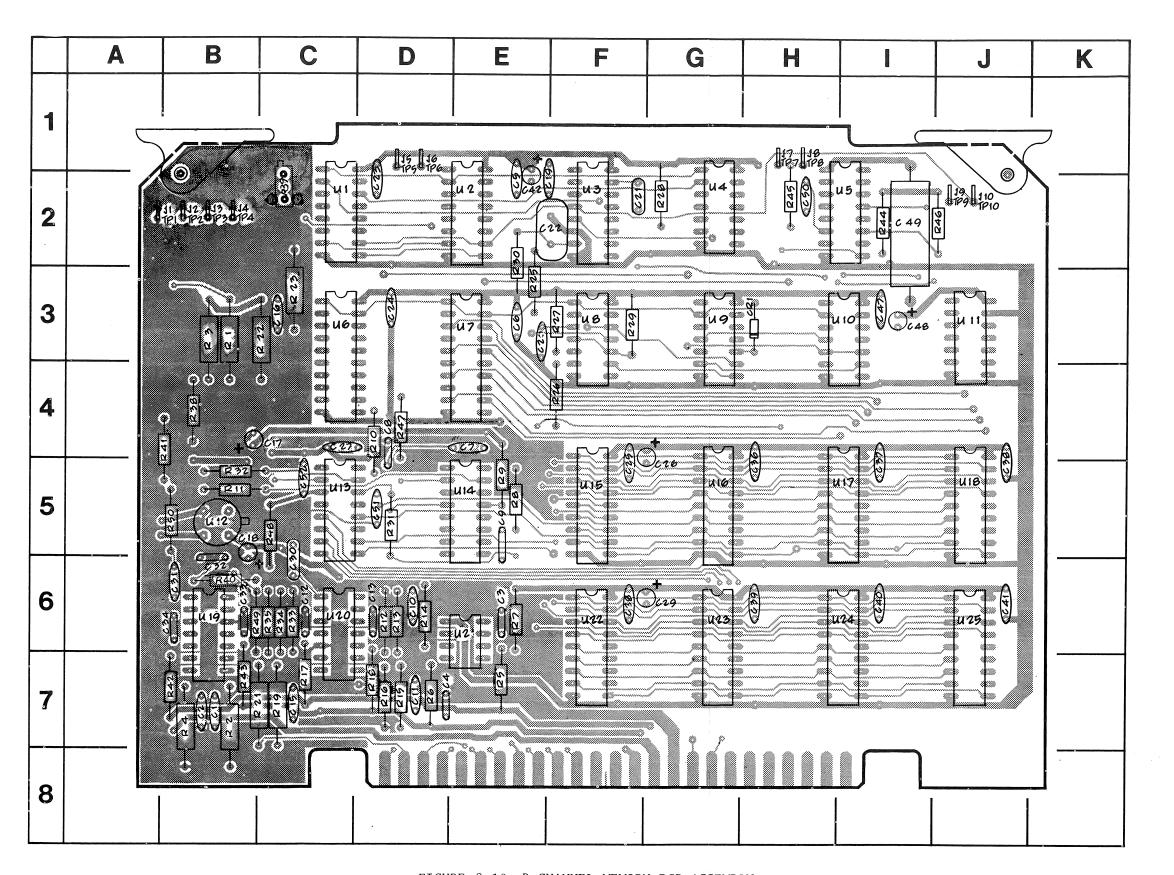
A CHANNEL MEMORY PCB ASSEMBLY
